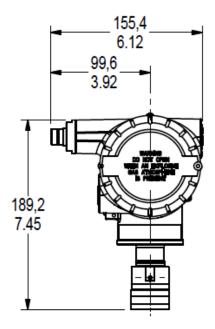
In-Line Gauge, typical mounting dimensions for STGW73L, STGW74L, STGW77L, STGW78L, STGW79L (remote antenna adaptor shown, rear view)
